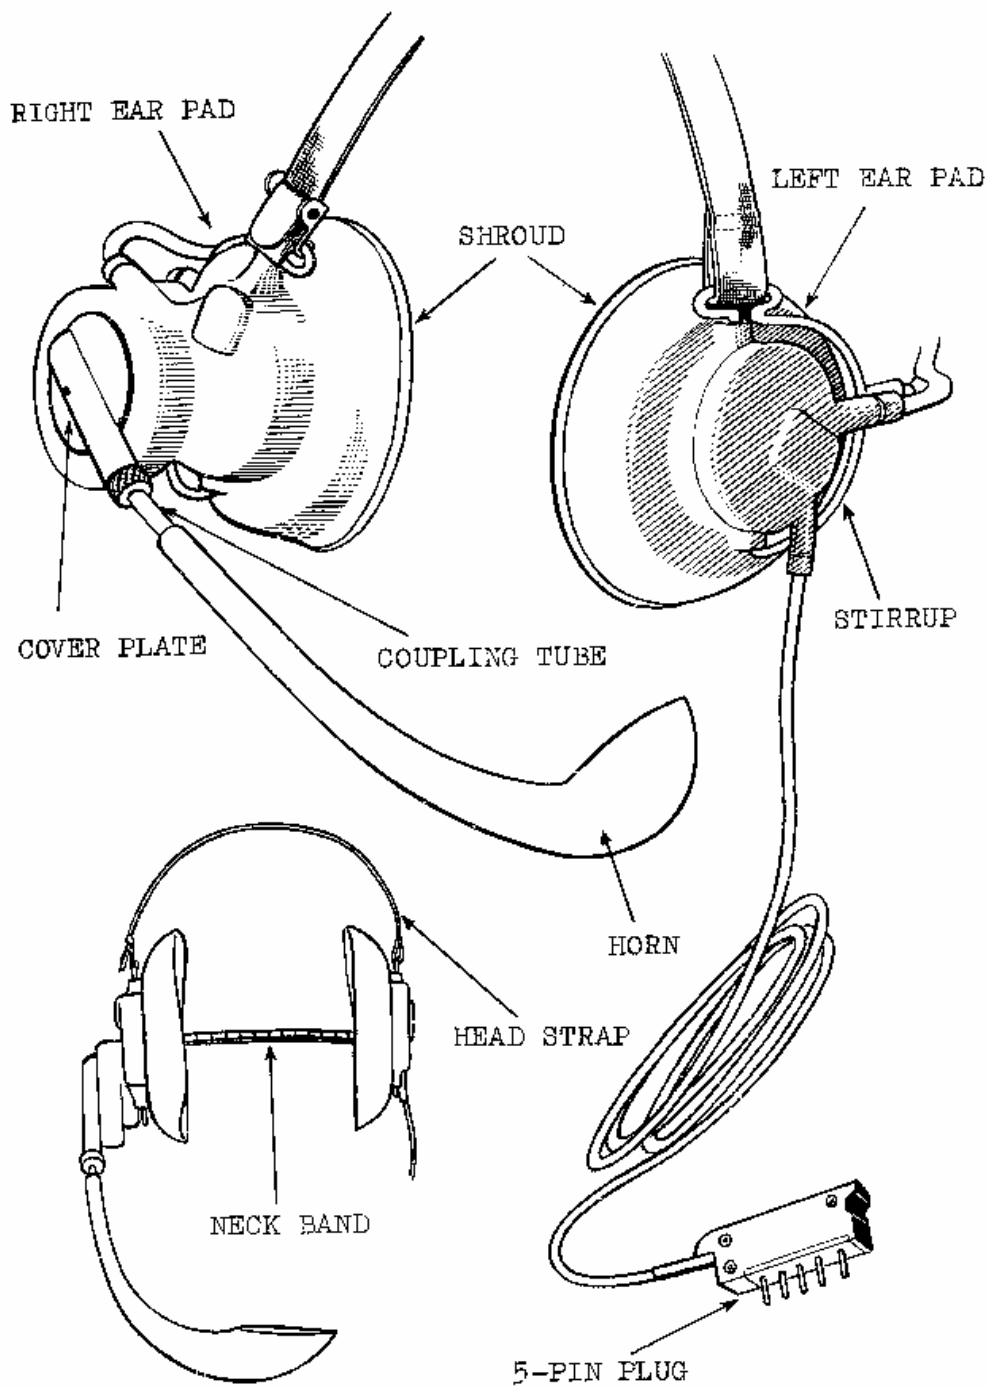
MICROPHONE AND RECEIVER HEADGEAR ASSEMBLIES,
